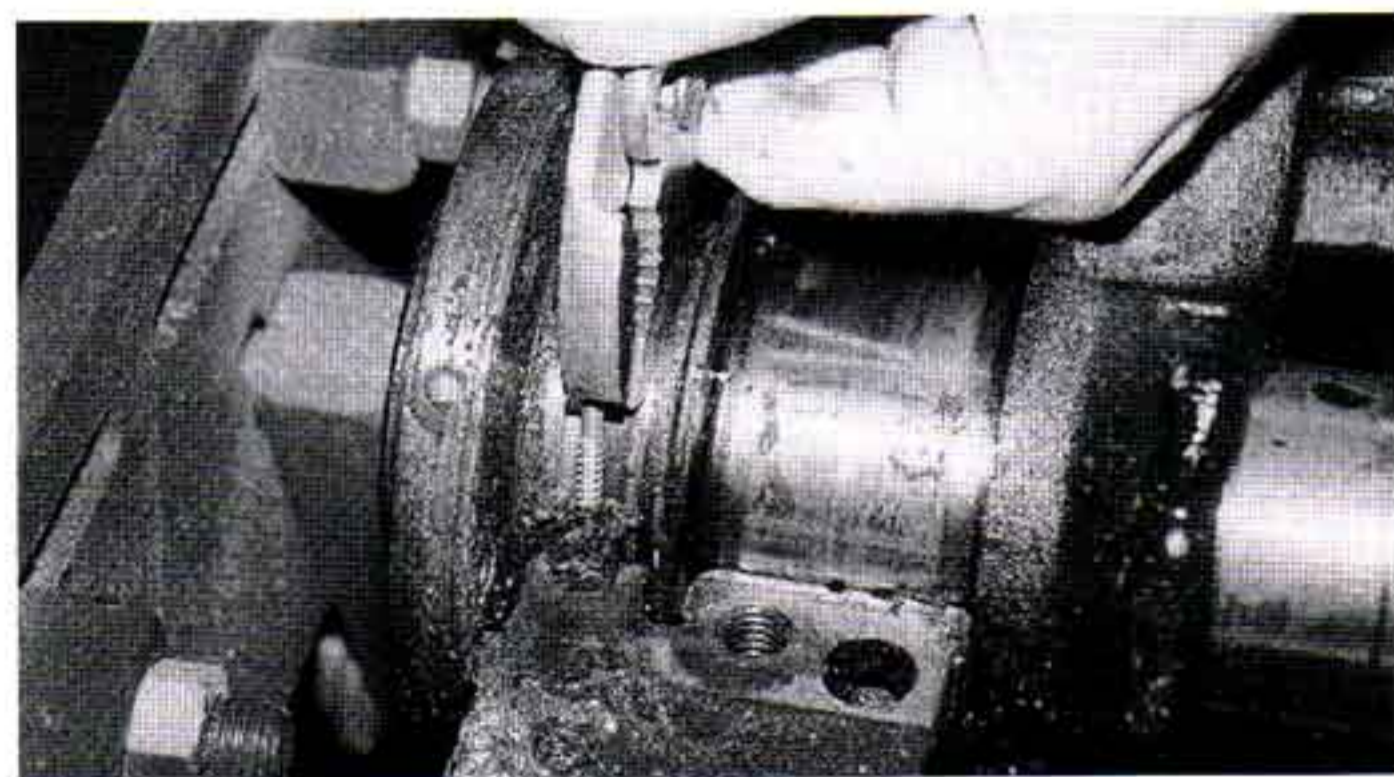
The rope seal is placed in a groove at the rear of the engine block and rides against the rear main journal of the crankshaft. Sometimes you can get lucky and rotate the crankshaft and the rope seal will rotate with the crank and come out. If the seal doesn't rotate with the crankshaft, screw a #6 sheet metal screw into the rope seal making sure not to make contact with the crank journal and just pull the screw and seal out.
